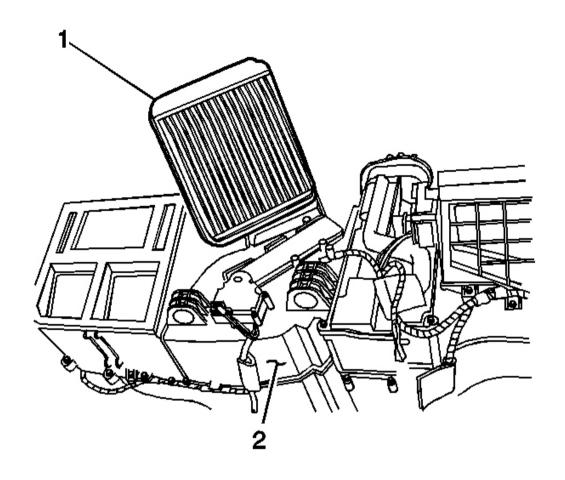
Heater Core Courtesy of GENERAL MOTORS CORP.
